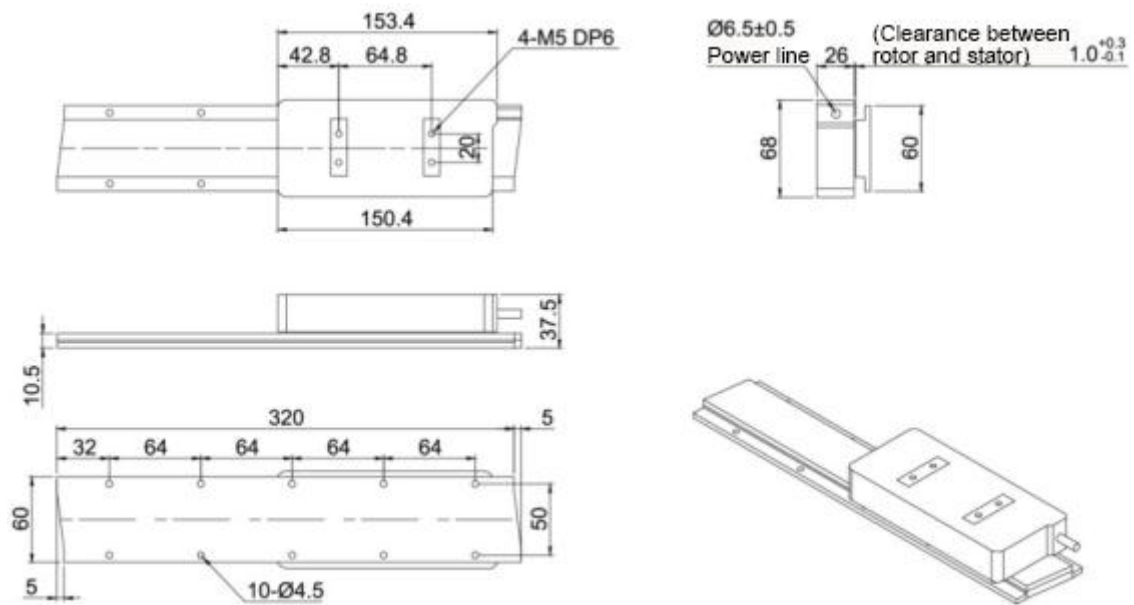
Dimensional drawing of WZCR-AZ60C2-□ motor
